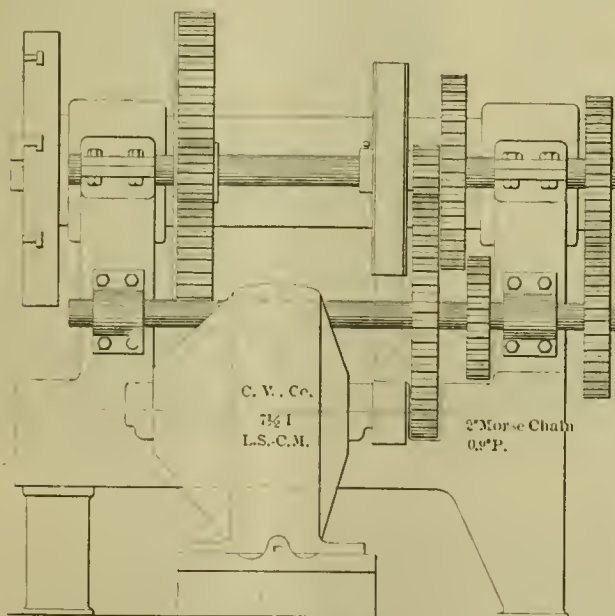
MOTOR DRIVE APPLIED TO SAUNDERS IXL PIPE CUTTER.
